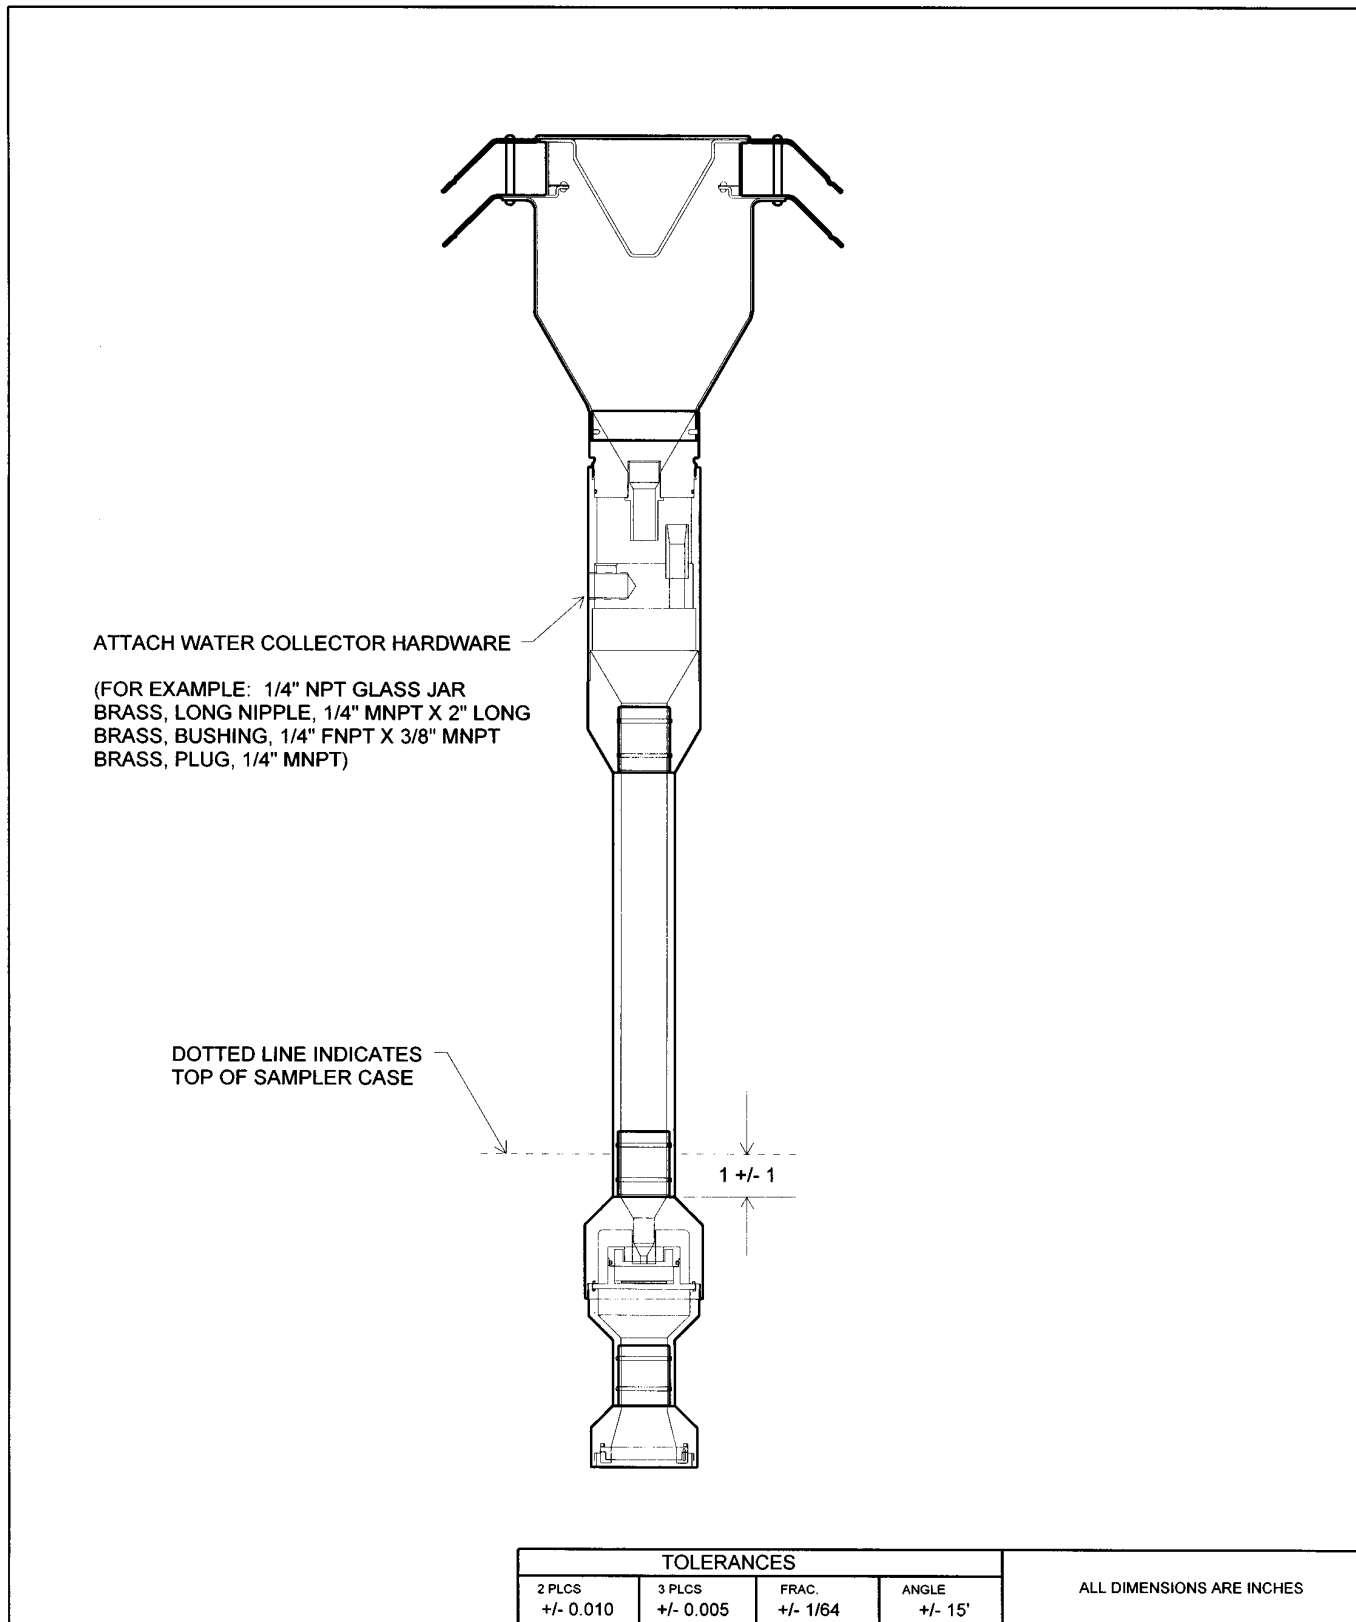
10-MICRON INLET, ASSEMBLY
